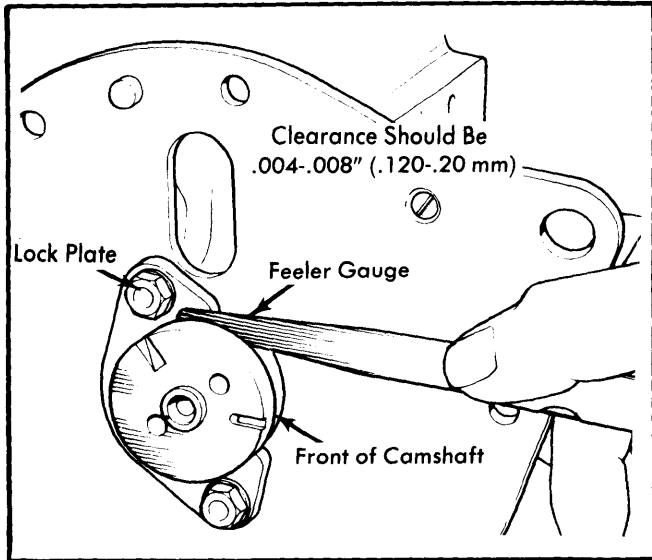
Feeler Gauge Method of Measuring Camshaft End Play
